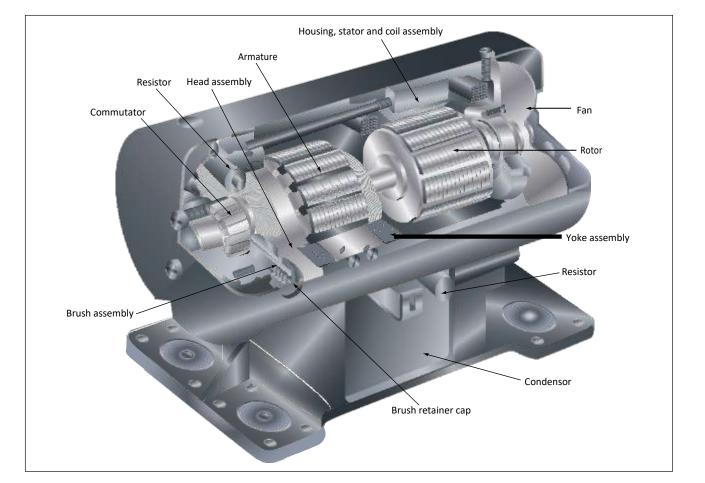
Cutaway view of inductor-type rotary inverter.
